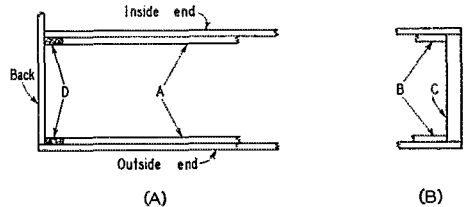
Detail sketches showing A, the joints at the rear of the drawer cavities and B, the joints at the front of the drawer openings. Both are top views.
